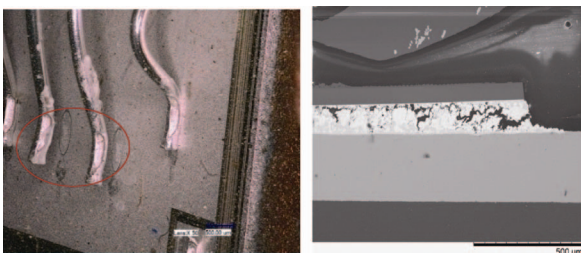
Bonding wire lift-off and solder fracture^[17] after fatigue
